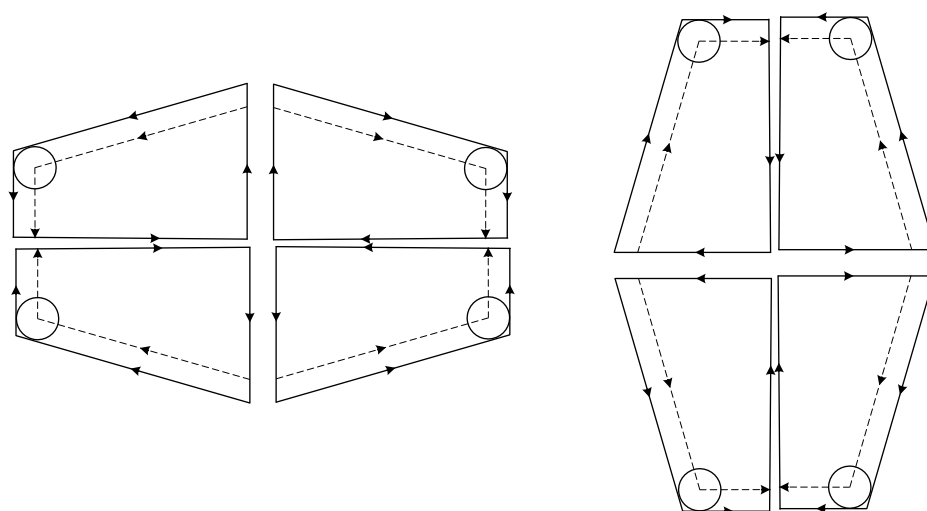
G90/G94 tool nose radius compensation
